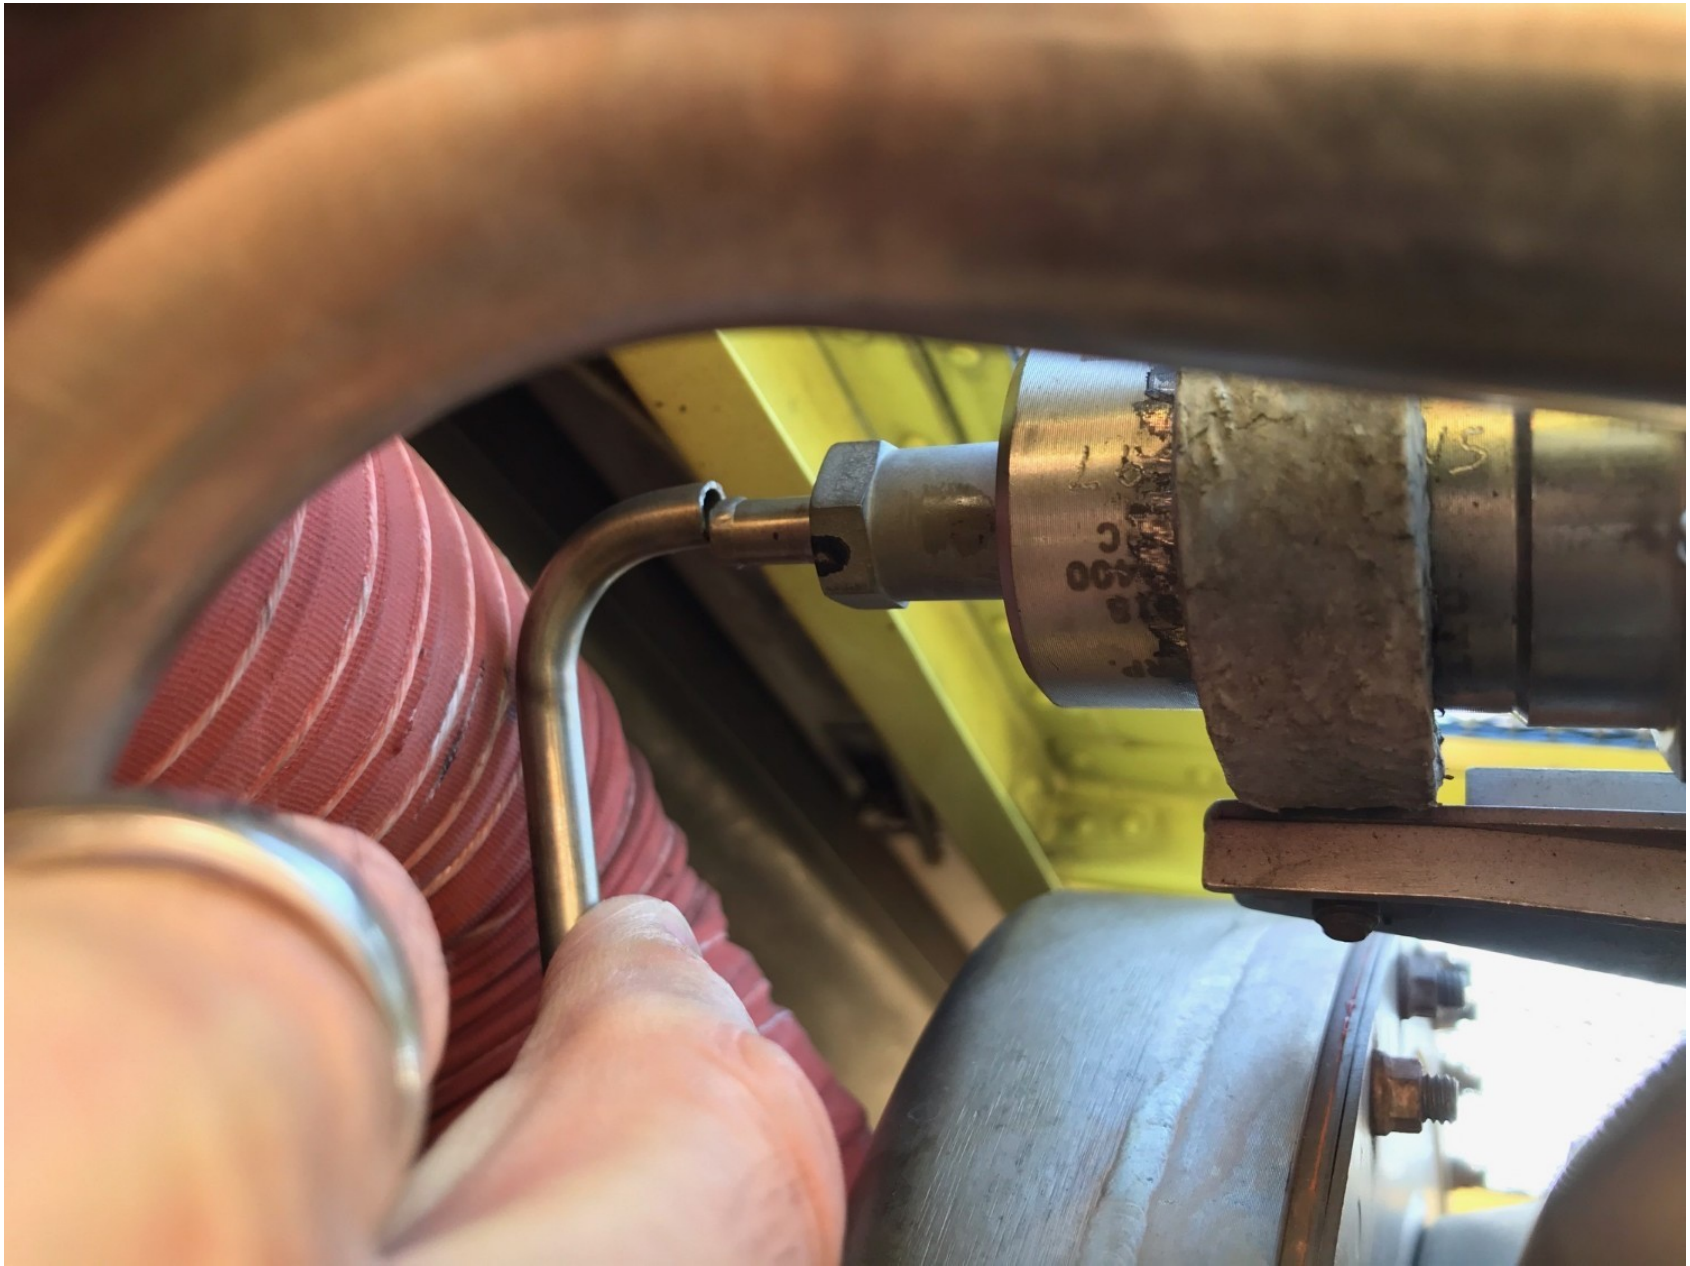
Supplied photo with a view the Pc Line and its filter. There is a separation in the pneumatic line.
